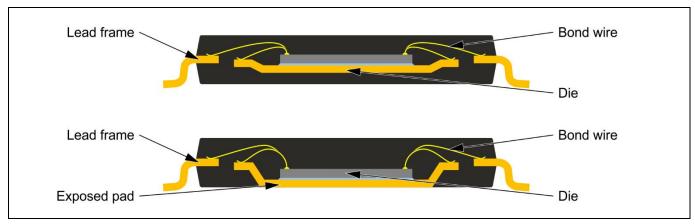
Schematics showing the inner setup of a QFP without (top) and with exposed die pad (bottom).
